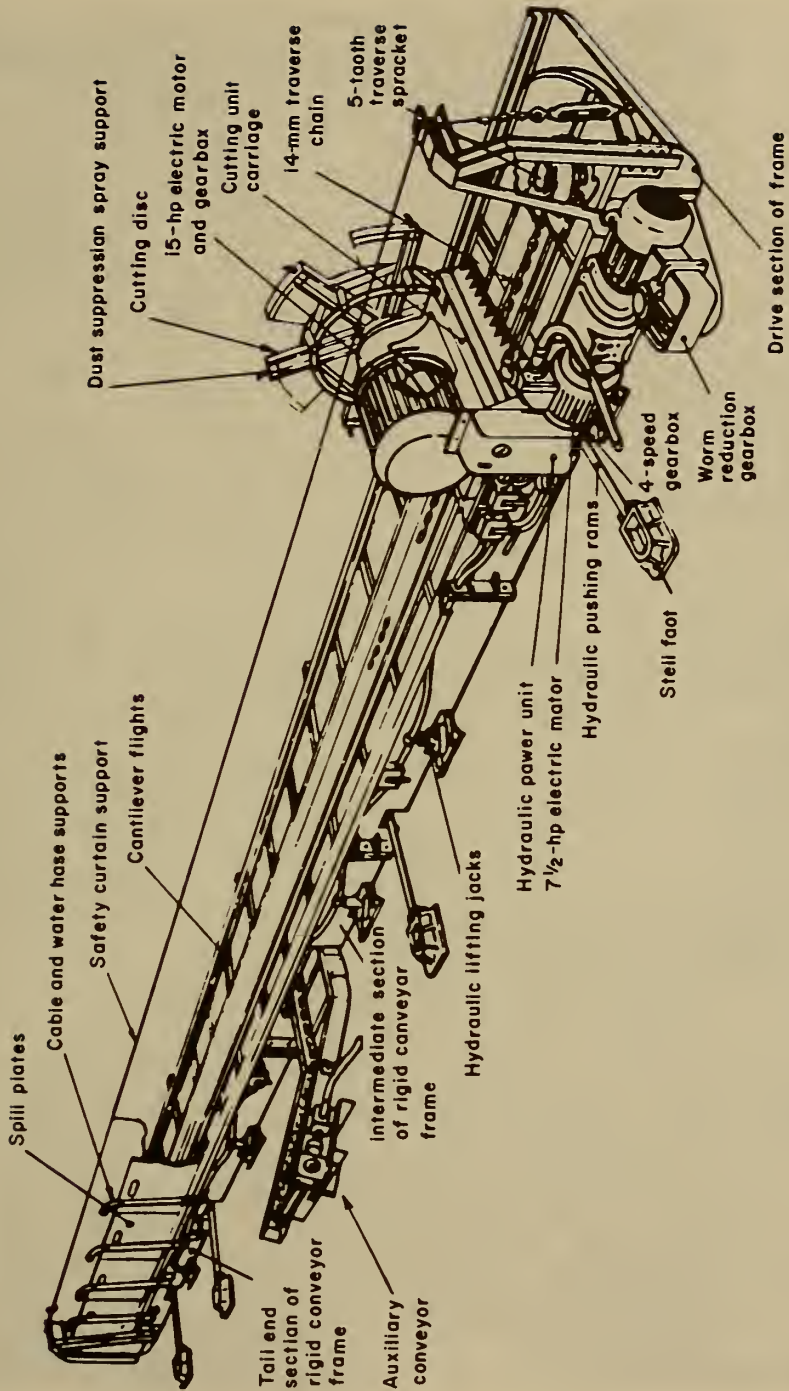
The Dawson Miller stable hole machine (after 101).
